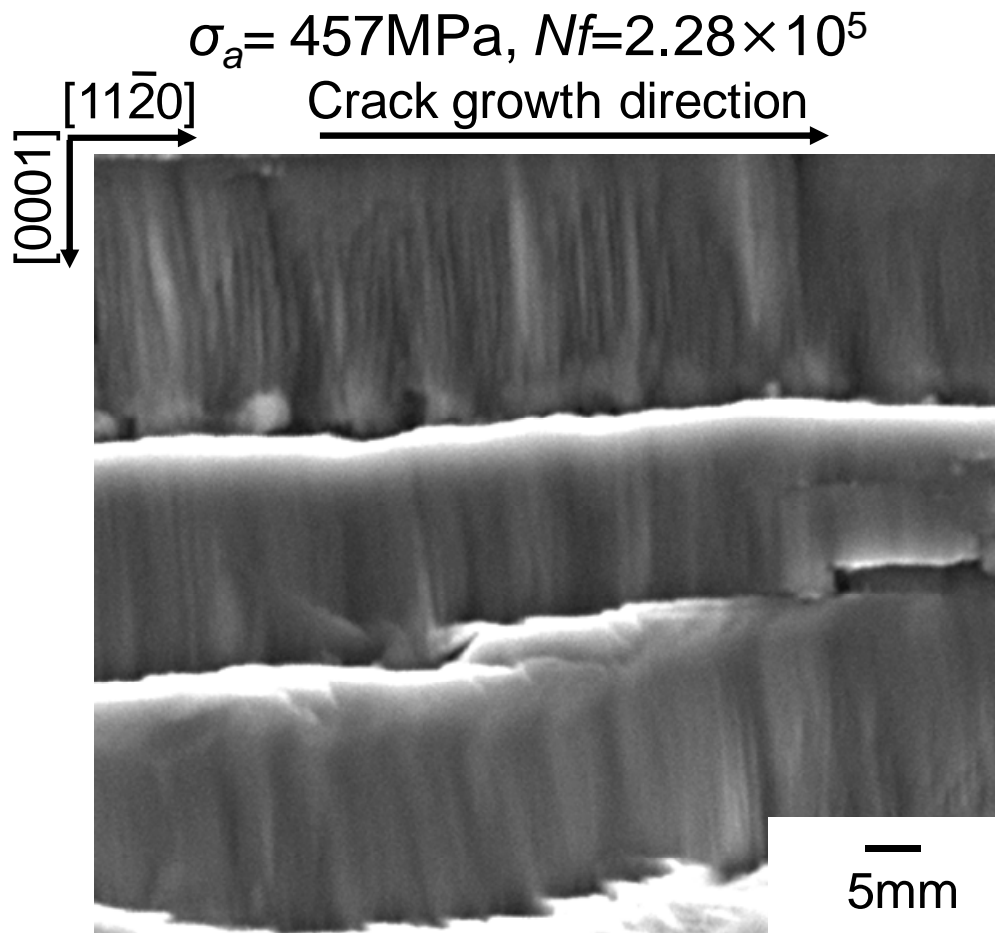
Fatigue fracture surface of B-specimen.
